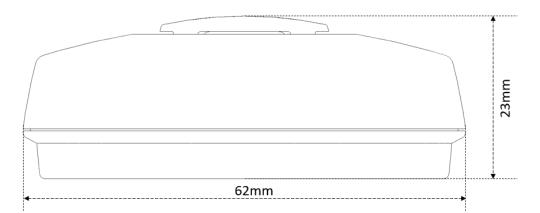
Modbus Gas and TrueVOC Sensor Dimension – Side View Flush Mount
